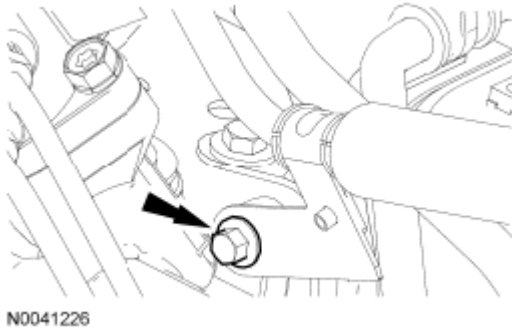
Locating Power Steering Pressure Hose Bracket Bolt
